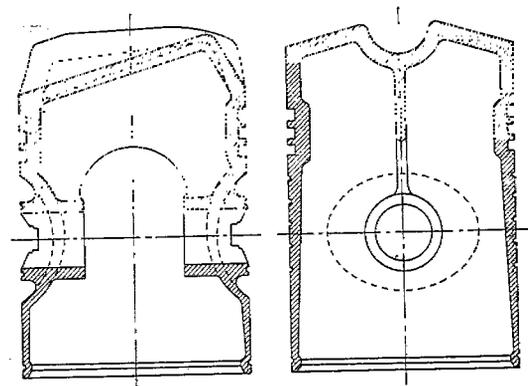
Sectional views of pistons 3 and 4 (aluminum alloy)
